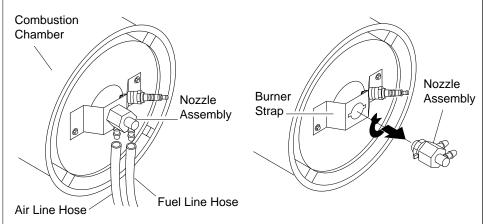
Removing Air and Fuel Line Hoses, 35/50 Models
